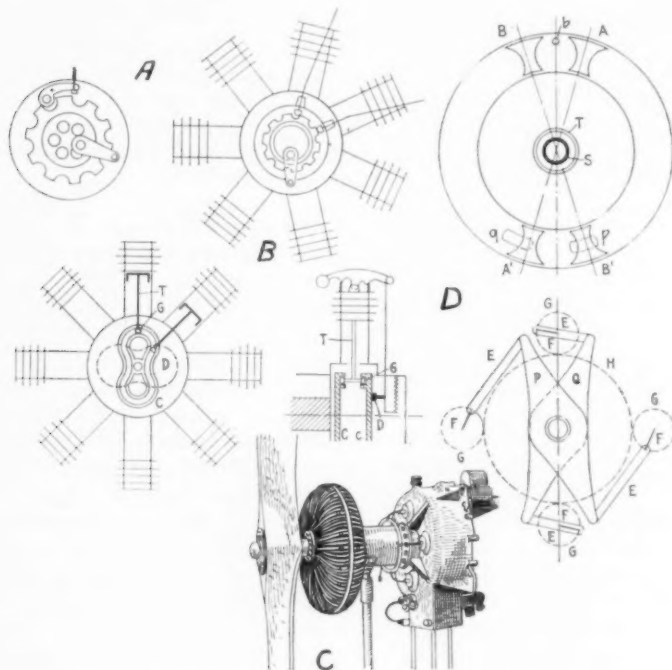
A DBÉNAIN ENGINE; B SIVA ENGINE; C AND D ESSELBH ENGINE
